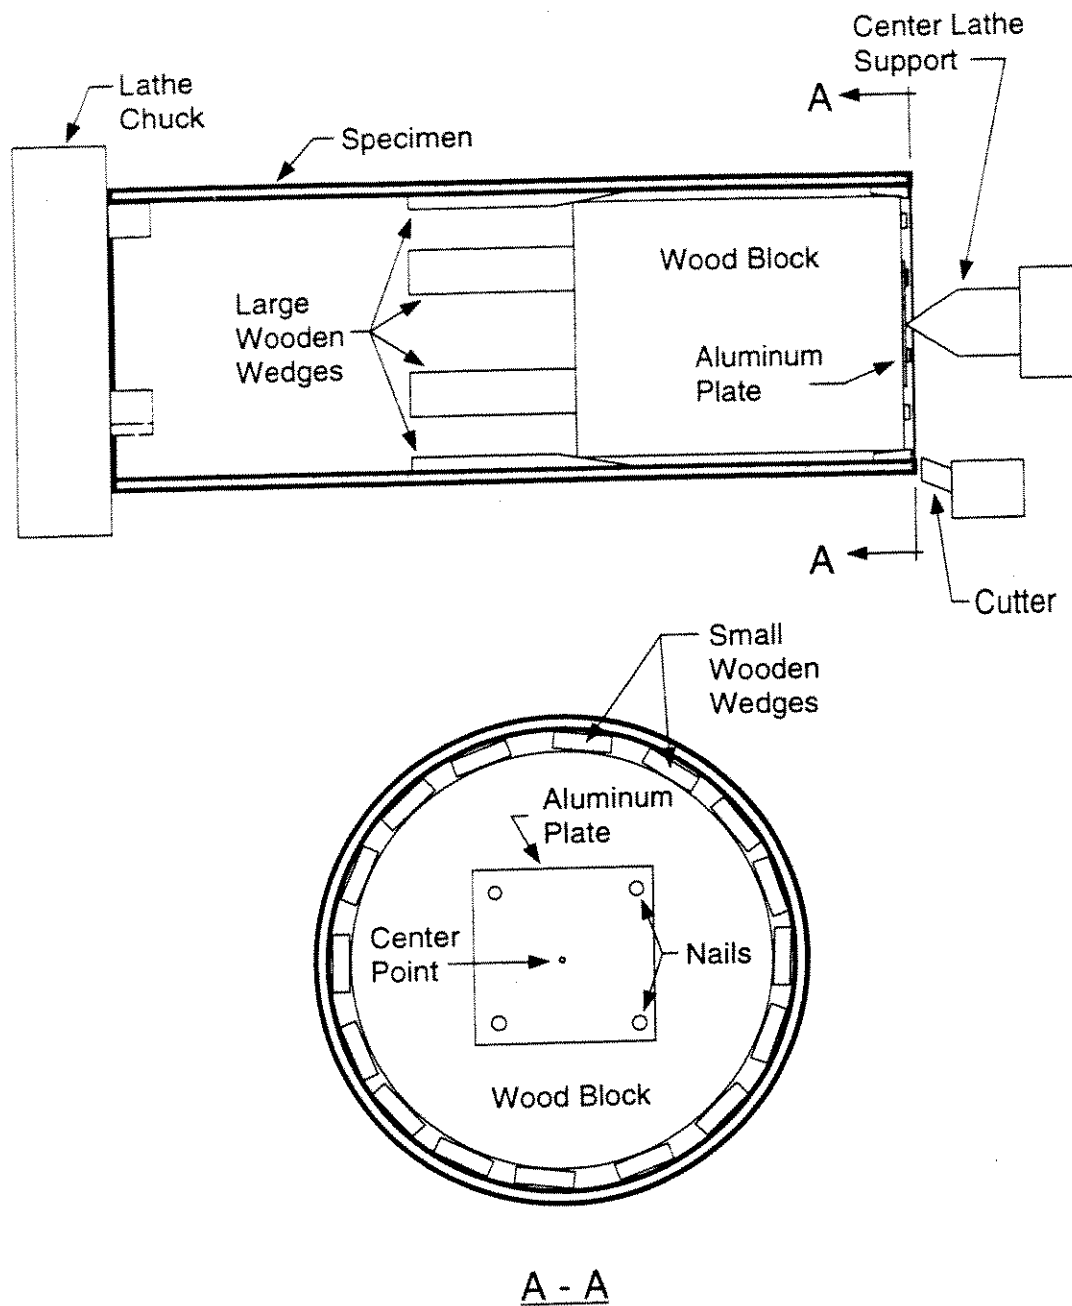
Arrangement in Lathe for Milling Specimen Ends
